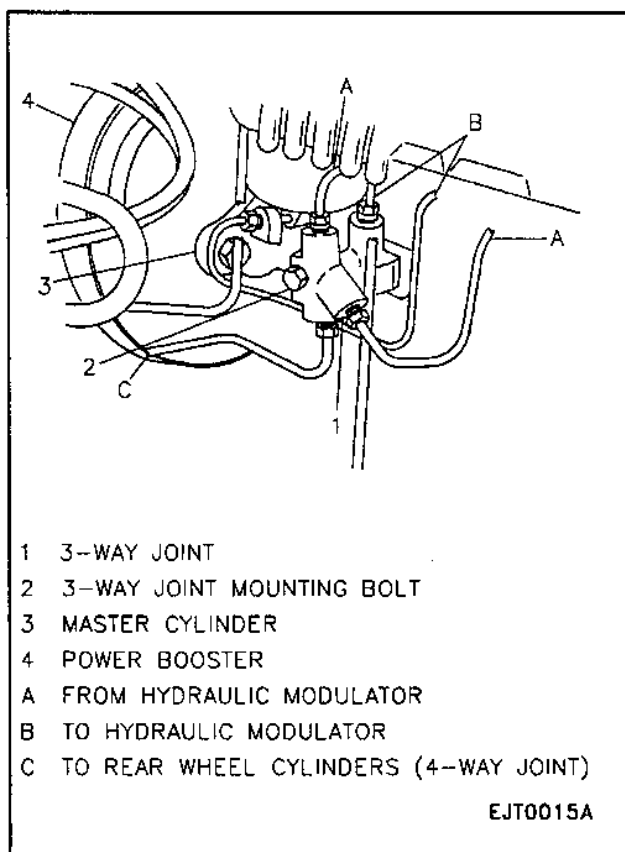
Master Cylinder Pipes / 3-Way Joint (ABS-Equipped)
